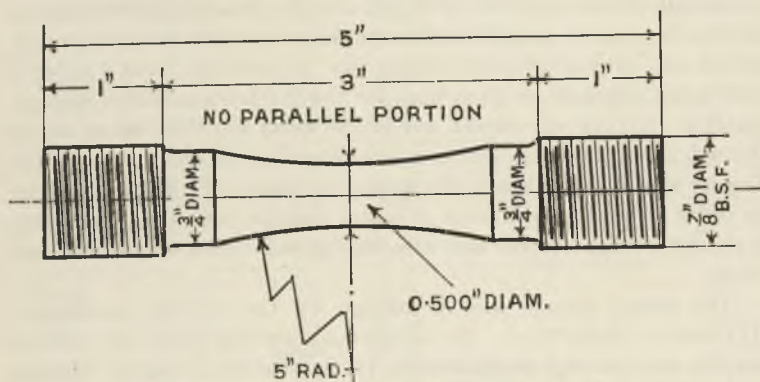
Fatigue Test-Piece (for Tests on Lead).
